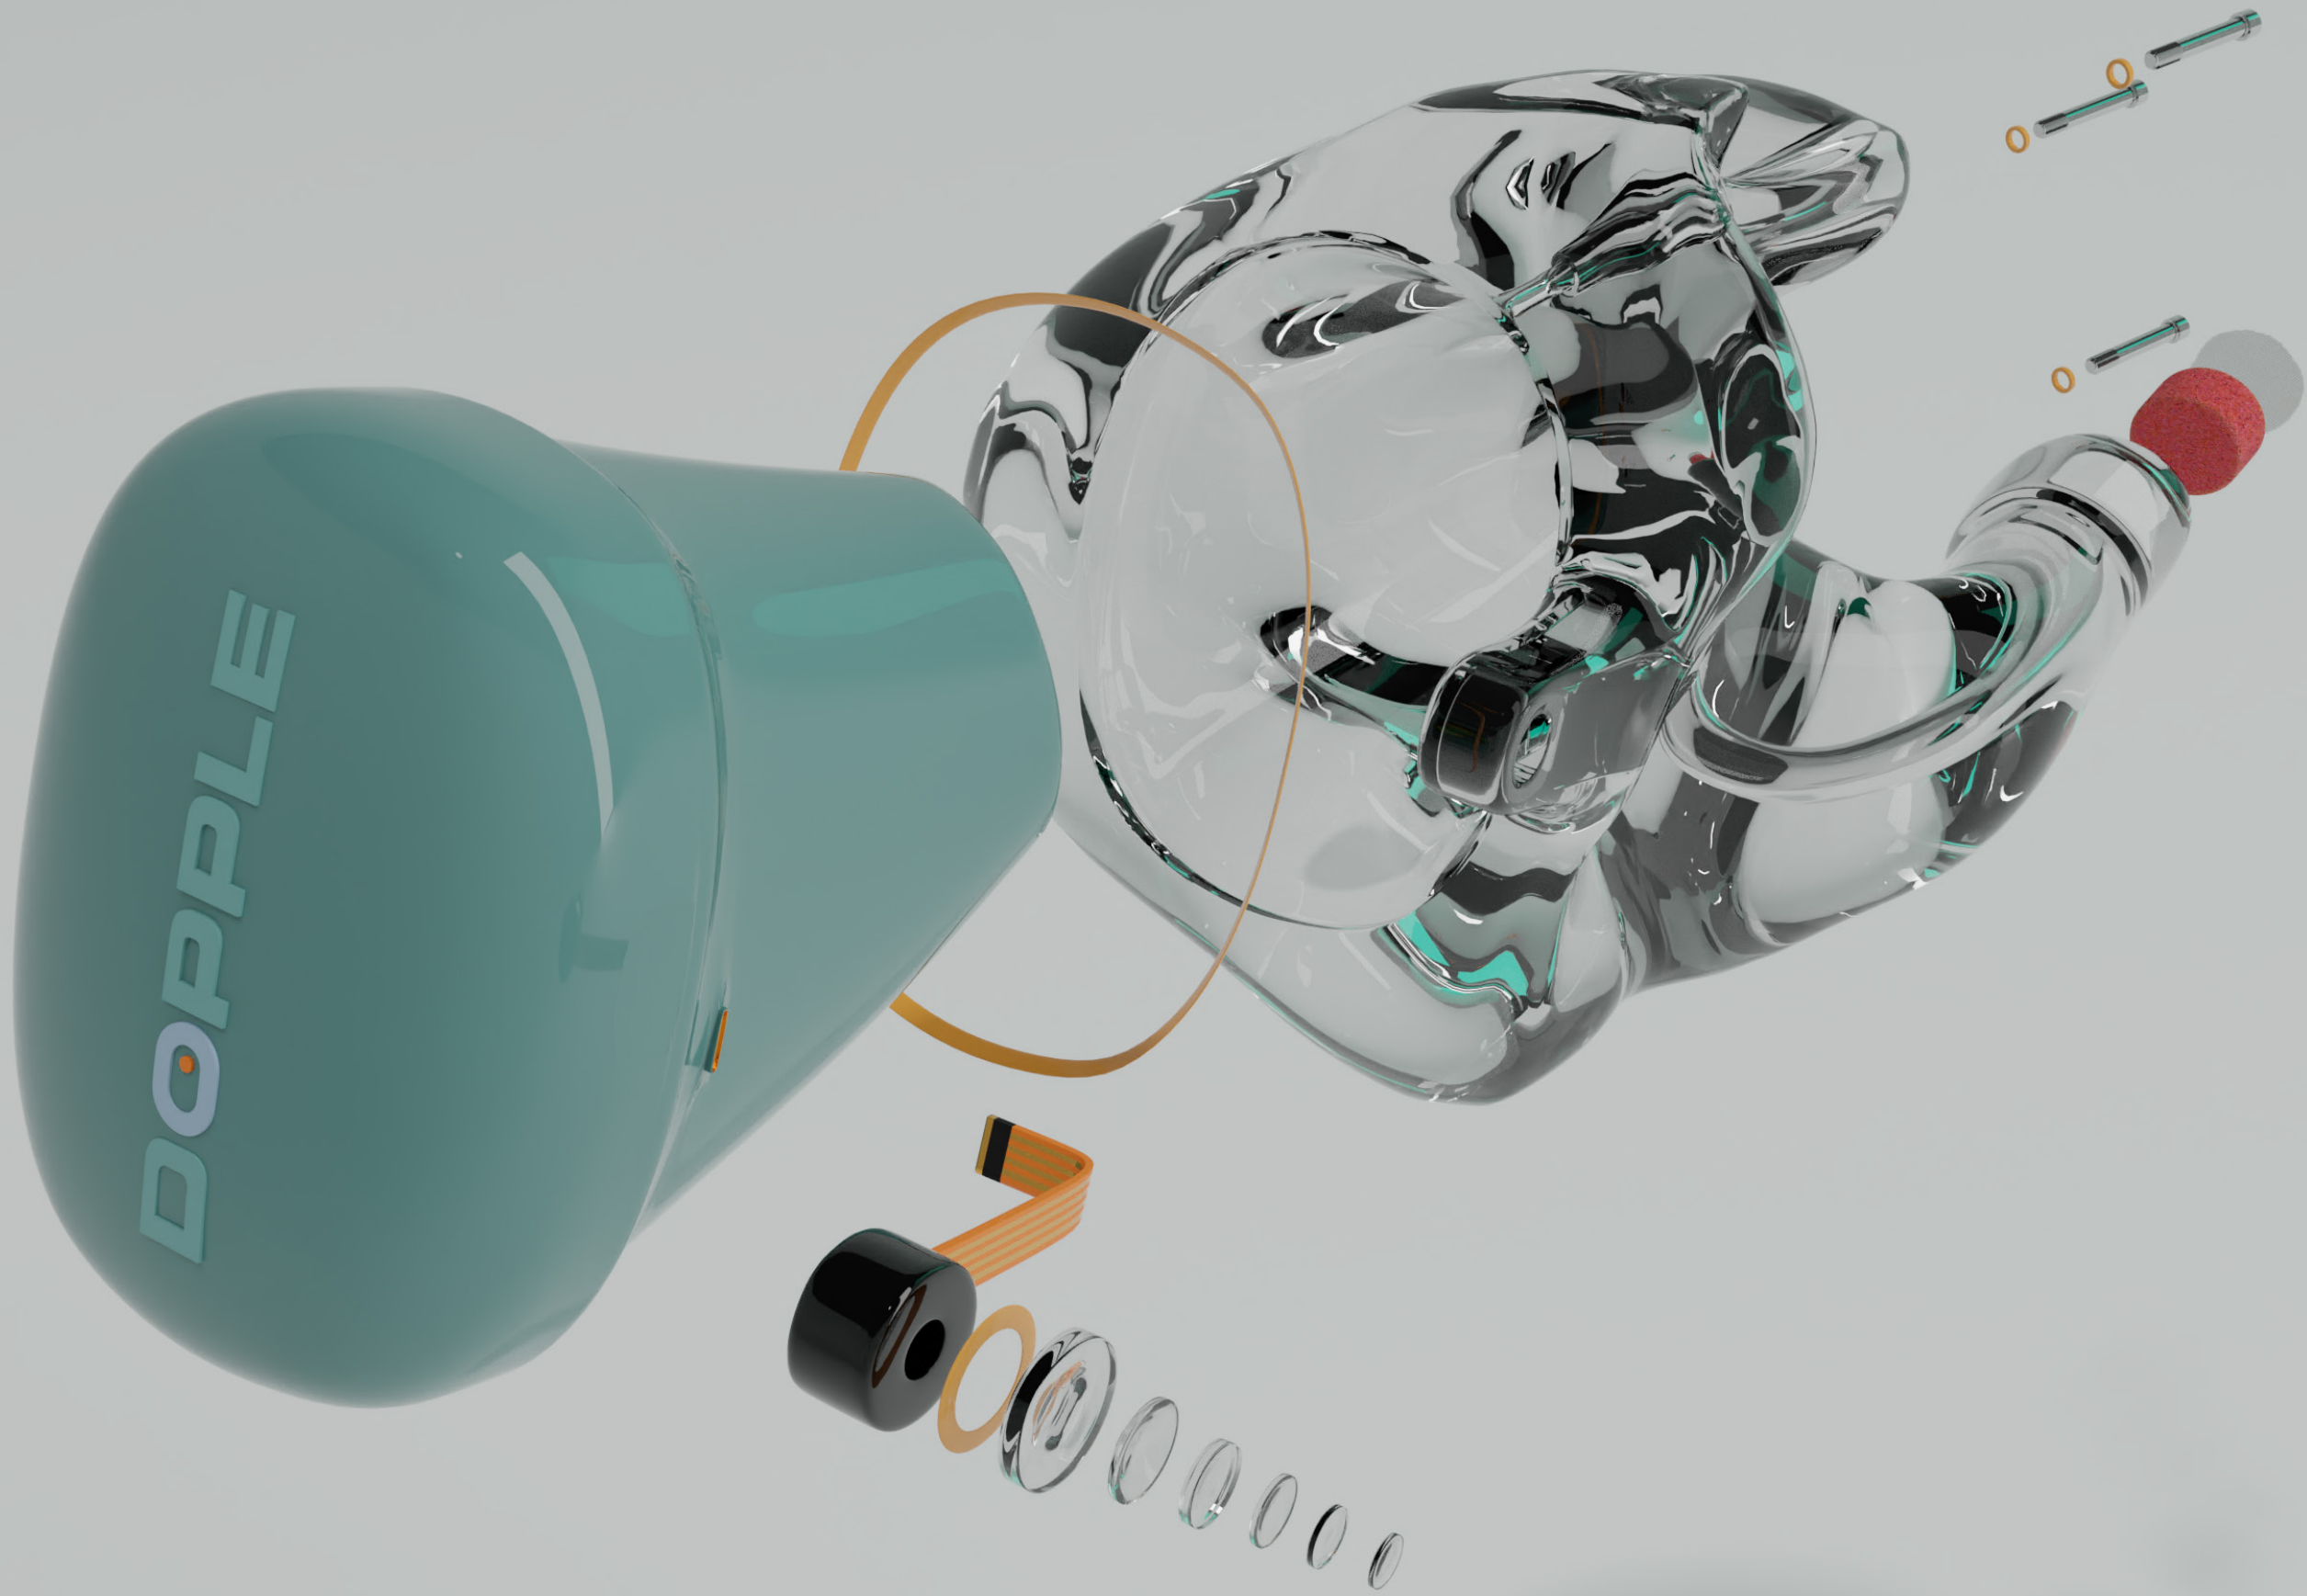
Exploded isometric view of a Dopple Earbud IEM.
